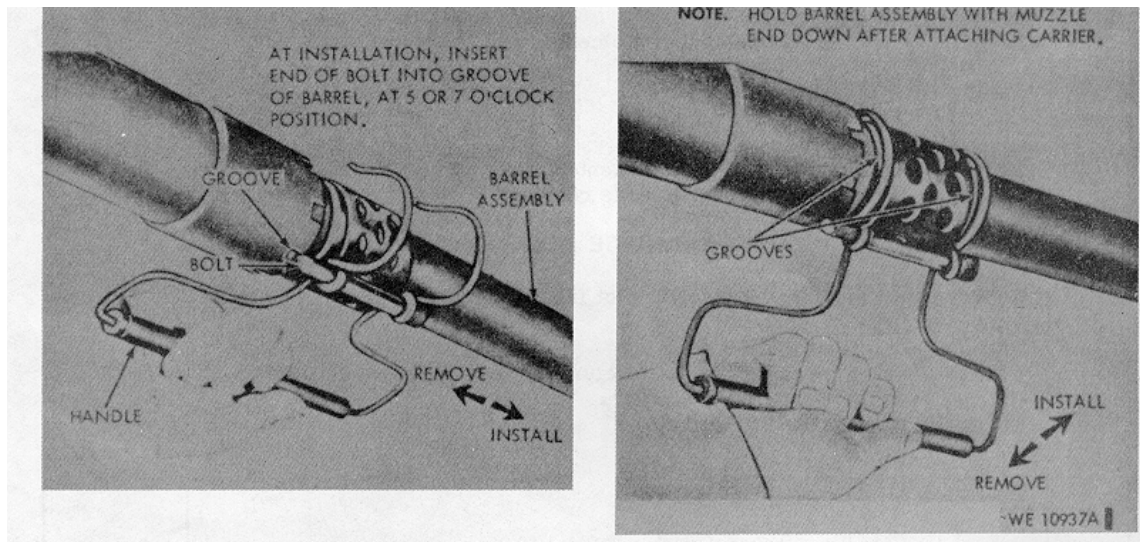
(Superseded) Removal/Installation - cal. .50 machine gun carrier assembly/
